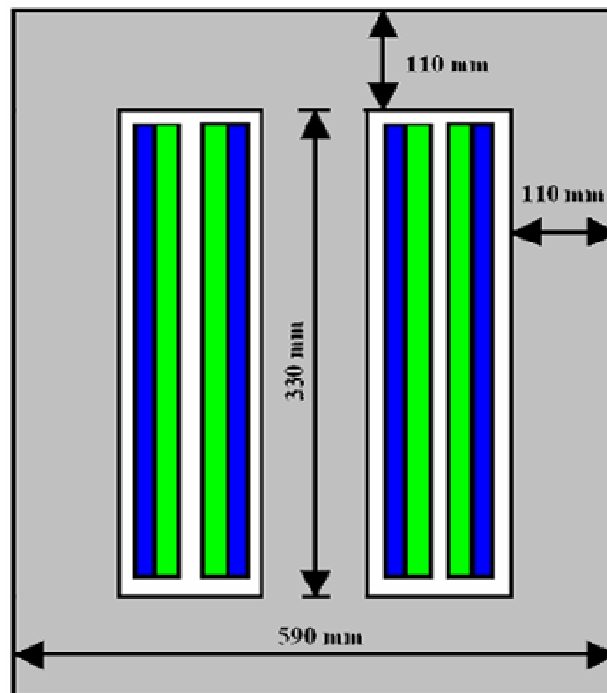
Sketch of the transformer, dimensions in millimeter [1].
